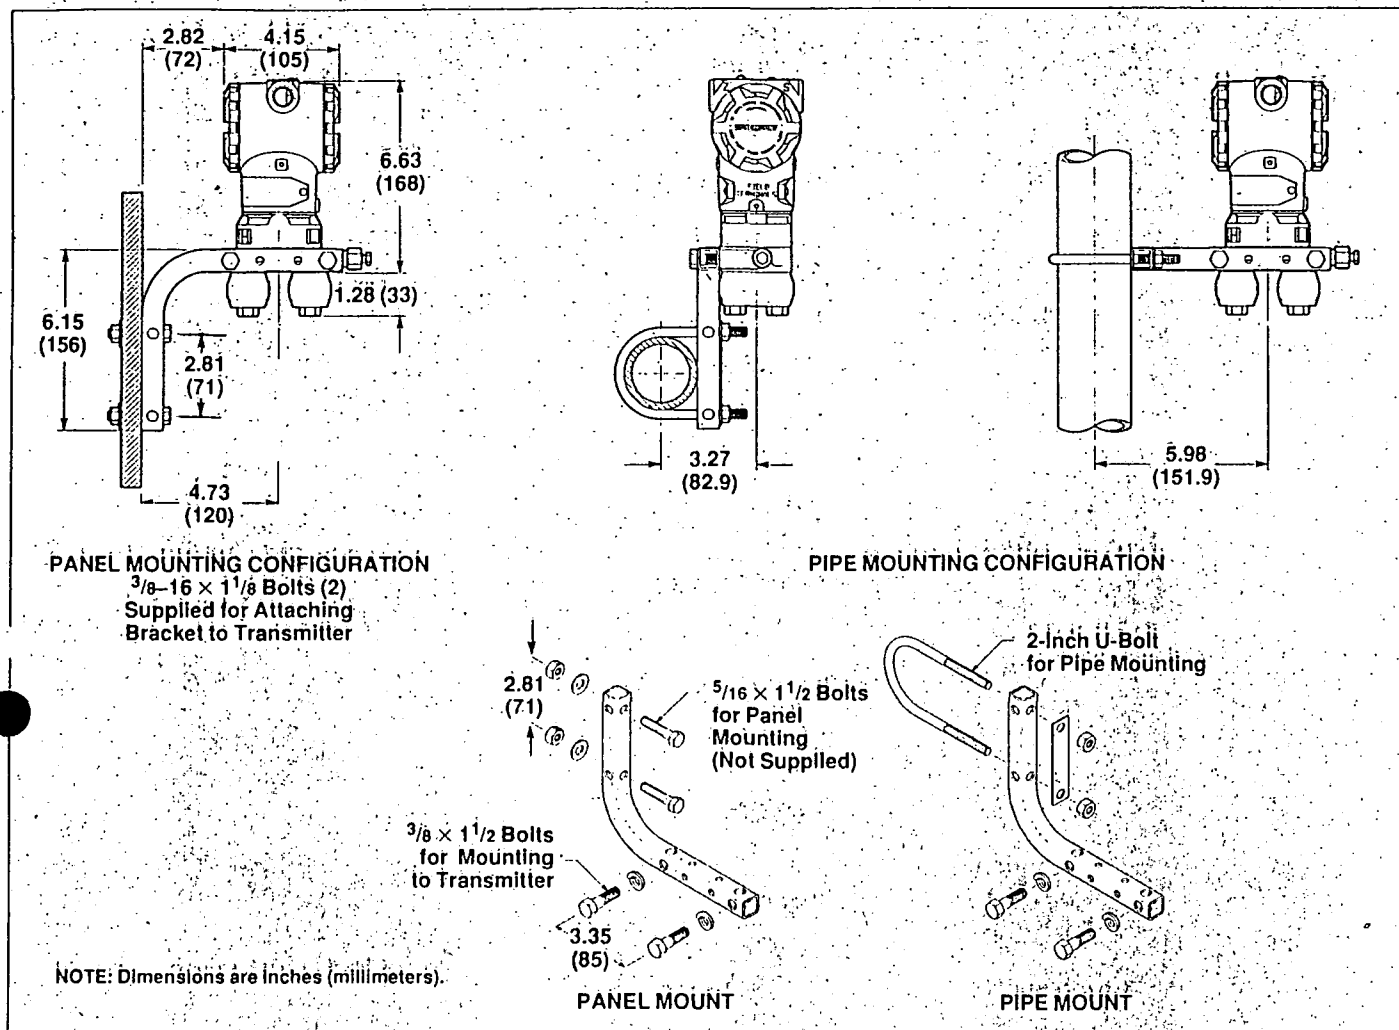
Transmitter with Coplanar Flange Shown in Typical Mounting Configuration with Optional Bracket (Option Code B4) for 2-inch Pipe or Panel Mounting
